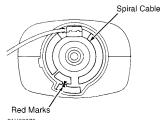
Adjusting Air Bag Spiral Cable Courtesy of Toyota Motor Sales, U.S.A., Inc.
